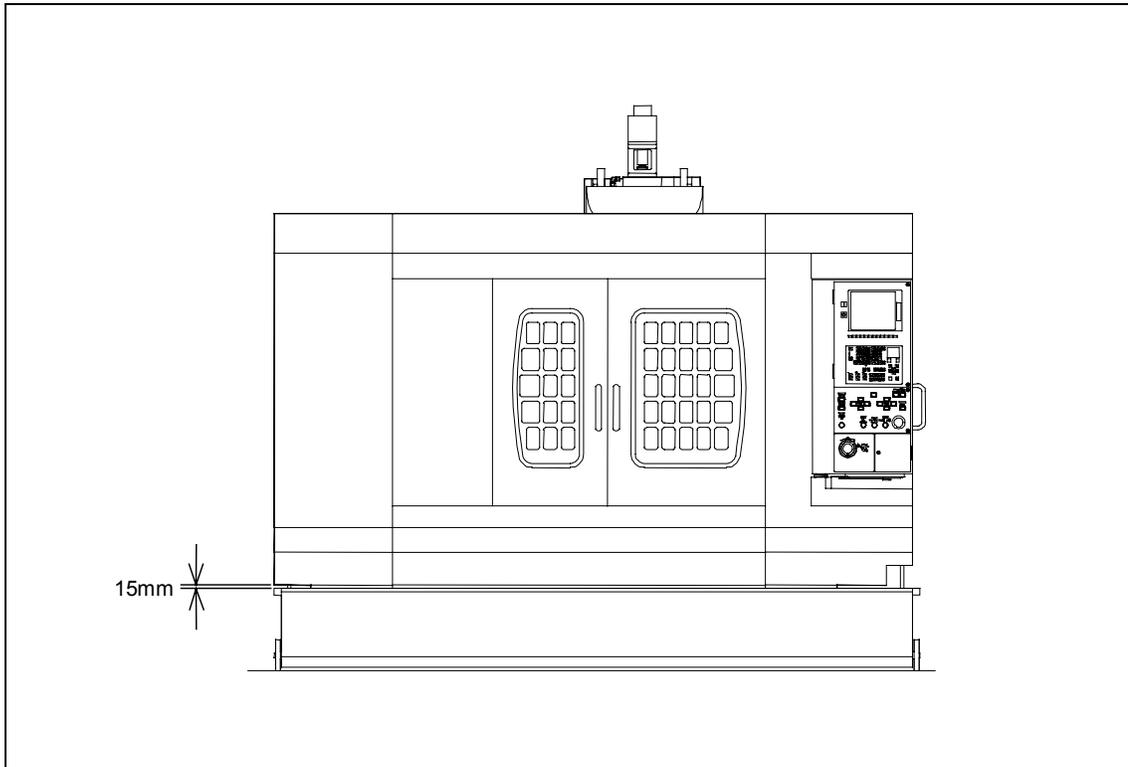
Adjustment of the clearance between the machine and the coolant tank
